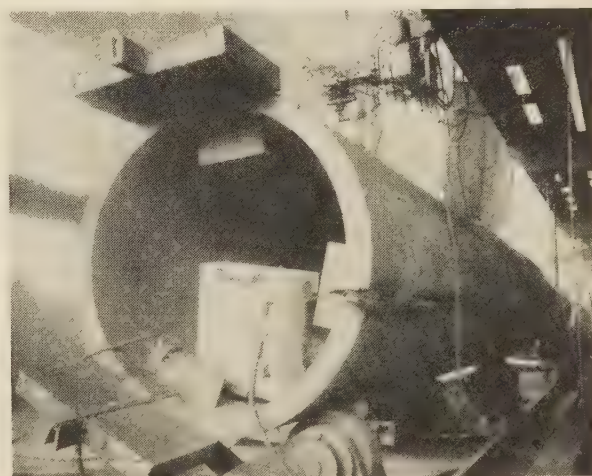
WELDED DRUM FOR HIGH-PRESSURE BOILER IN COURSE OF CONSTRUCTION
